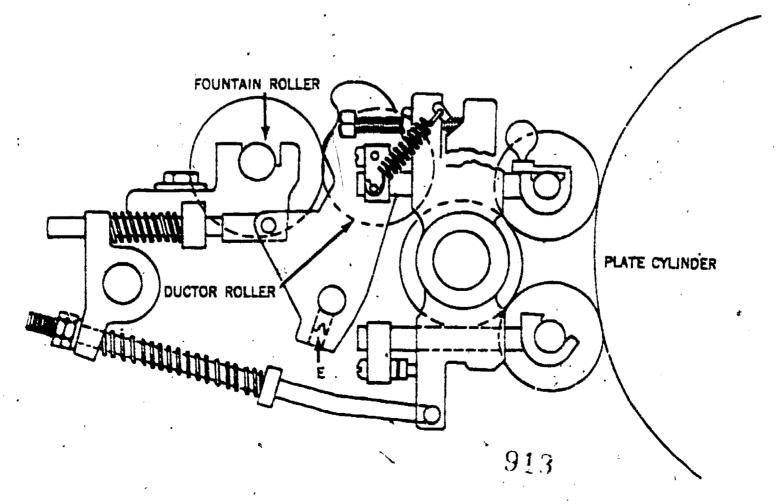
Setting and adjusting ductor roller (dampening assembly).
